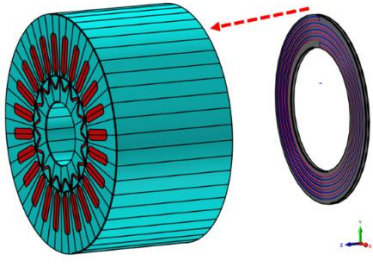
Concept of integrating a sensor to machine's end-winding.
